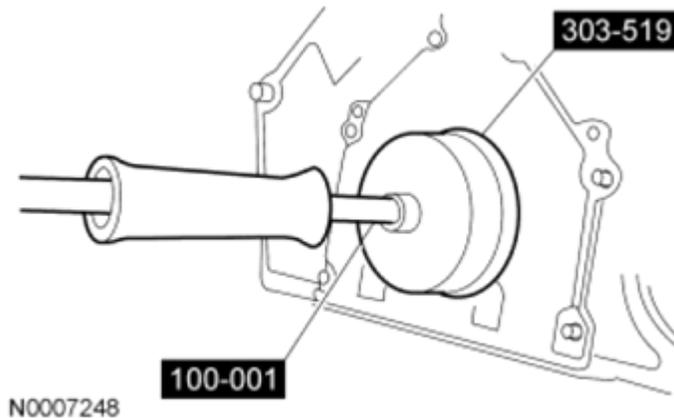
Removing Crankshaft Rear Seal Using Special Tools
